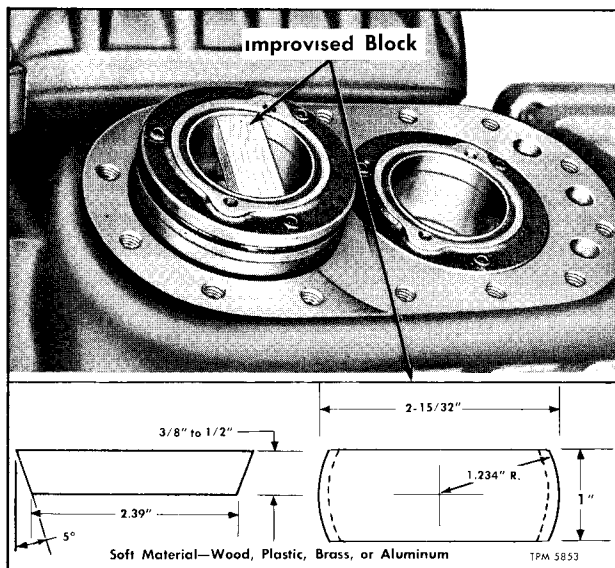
Using Improvised Block To Remove Suction Valve and Liner
